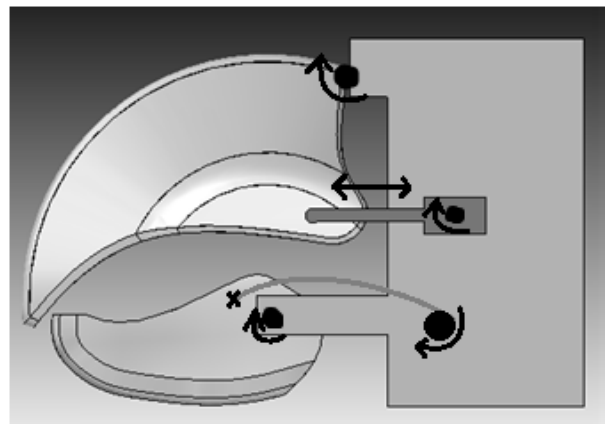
Gripper articulation showing lower jaw cable and linear actuator rotation
